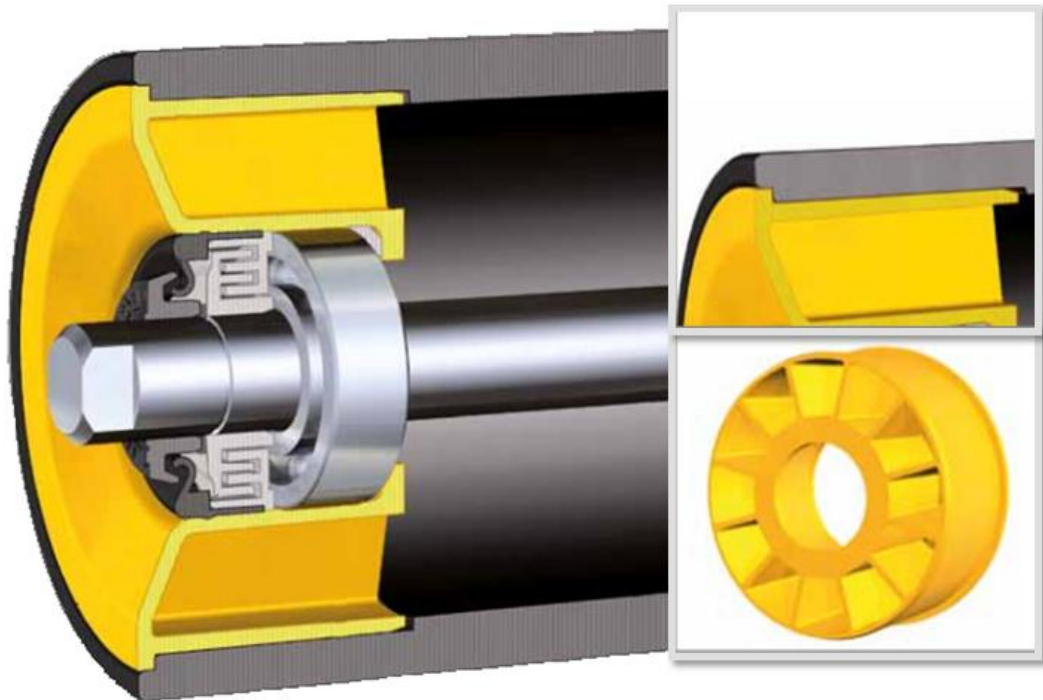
Top Roller cut away (main) and insert details (Rulmeca 2012)
